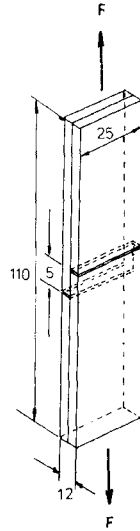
Test specimens for shear strain determination (Ref. 5,6) (Dimensions in mm)
